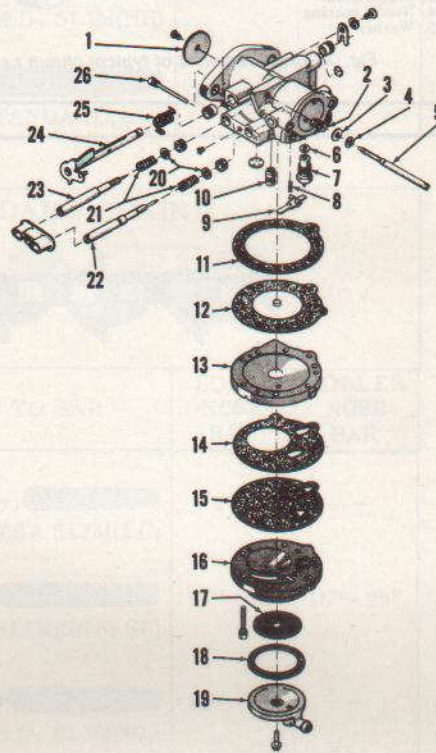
Exploded view of Tillotson HL model carburetor used on 450, 550 and NU17 models.
